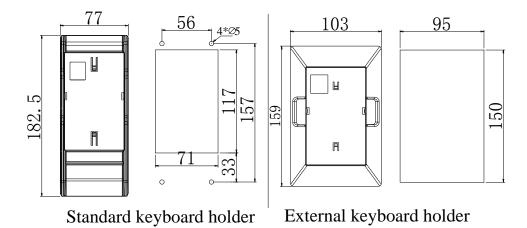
SV800 keyboard holder outlook and installation dimensions
